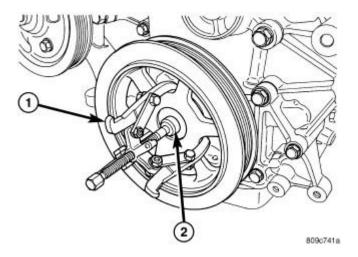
VIBRATION DAMPER - REMOVAL Courtesy of CHRYSLER LLC
